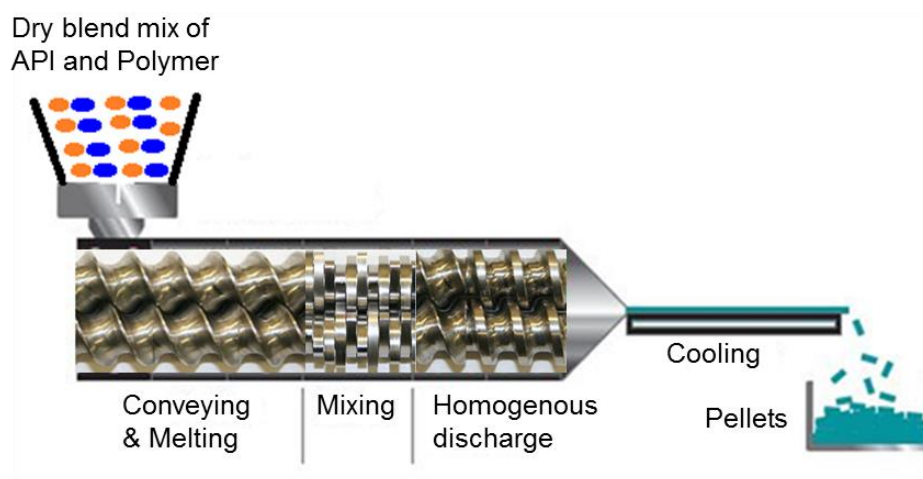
Schematic presentation of extrusion process in rotating screw extruder
